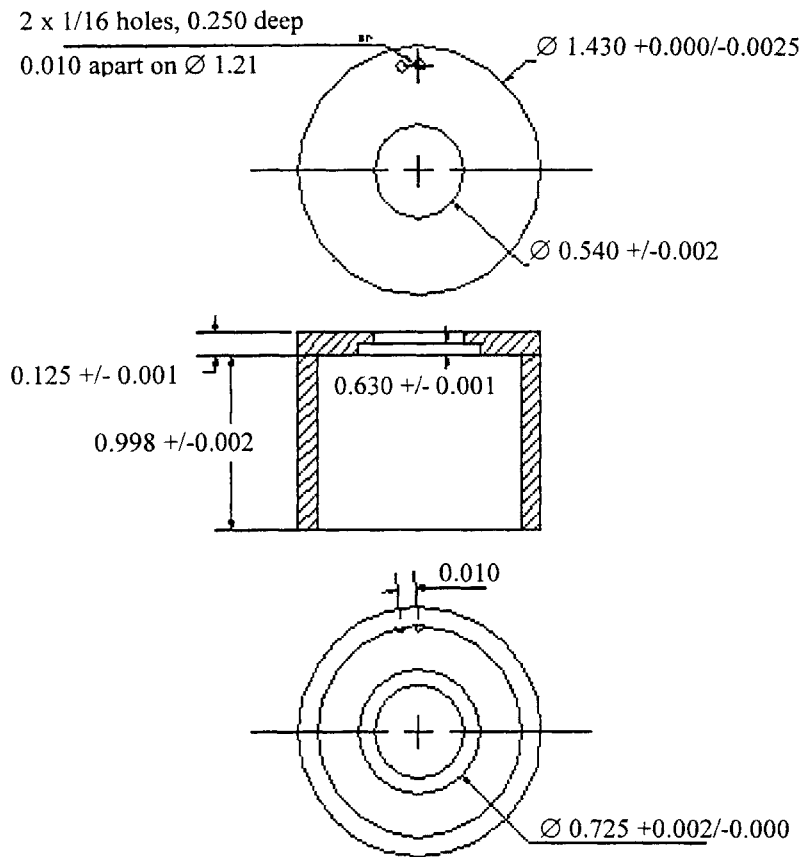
Standard orthographic View of the Outer Compression Spring Platform
